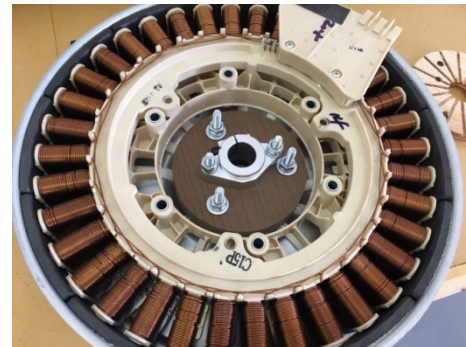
Underside of motor's rotator and stator showing the axle coupling disk. Bolt lengths remain to be trimmed.
